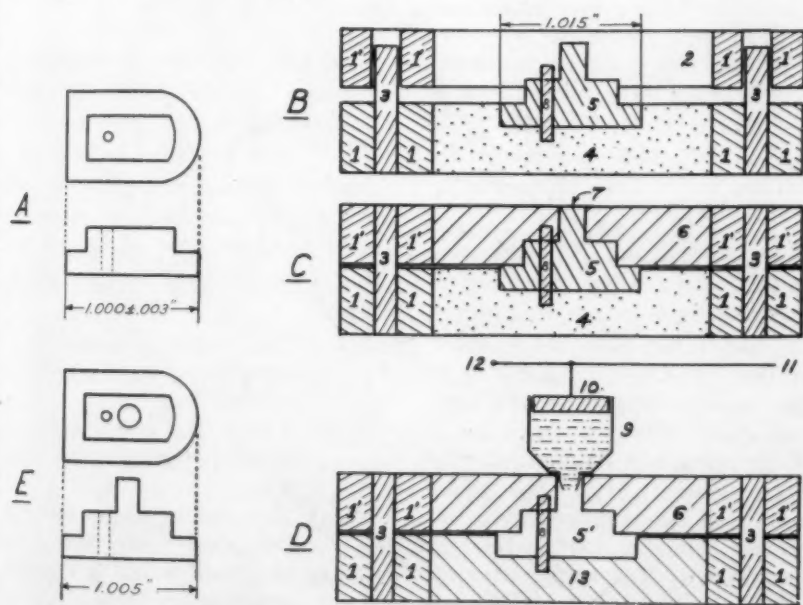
PRODUCTION OF METAL DIE AND WAX PATTERNS. A—VIEWS OF CASTING ACCORDING TO BLUE PRINT. B AND C—CROSS SECTIONS SHOWING METAL DIE CONSTRUCTION. D—CROSS SECTION SHOWING DIE ASSEMBLED FOR MAKING WAX PATTERN. E—VIEWS OF FINISHED PATTERN. 1 AND 1'—STEEL MATRIX. 2—RECTANGULAR OPENING CUT IN STEEL. 3—HOLDING PINS. 4—PLASTIC CLAY. 5—MASTER PATTERN. 6—FUSIBLE METAL FORMING UPPER MOLD HALF. 7—ENTRANCE SPRUE FOR WAX. 8—PIN SET IN DIE FOR FORMING HOLE IN PATTERN. 9—WAX GUN. 10—WAX GUN PISTON. 11 AND 12—WAX GUN HANDLE. 13—FUSIBLE METAL FORMING LOWER MOLD HALF.
